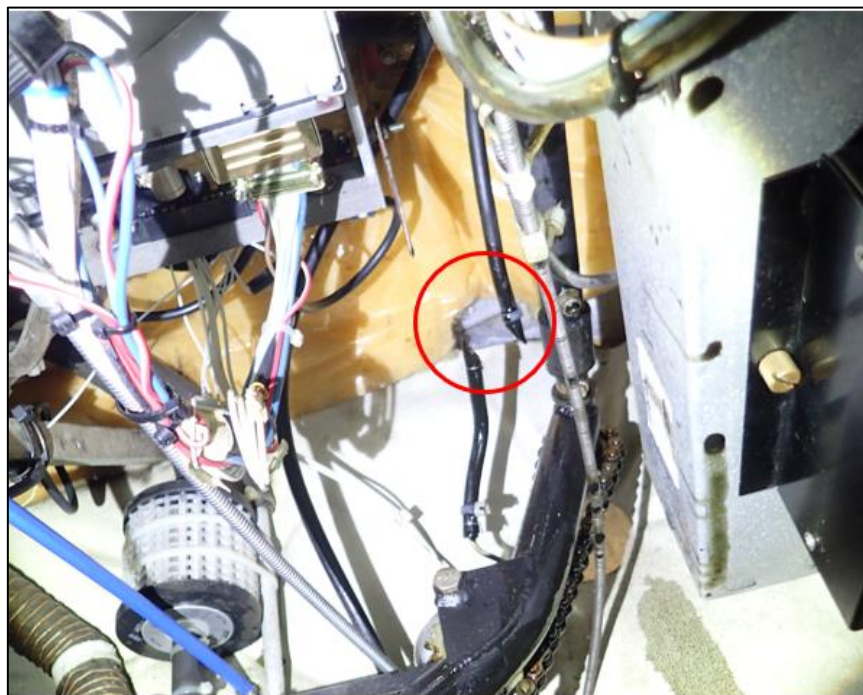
Fractured pipe (ringed in red) behind instrument panel (as viewed from below)
